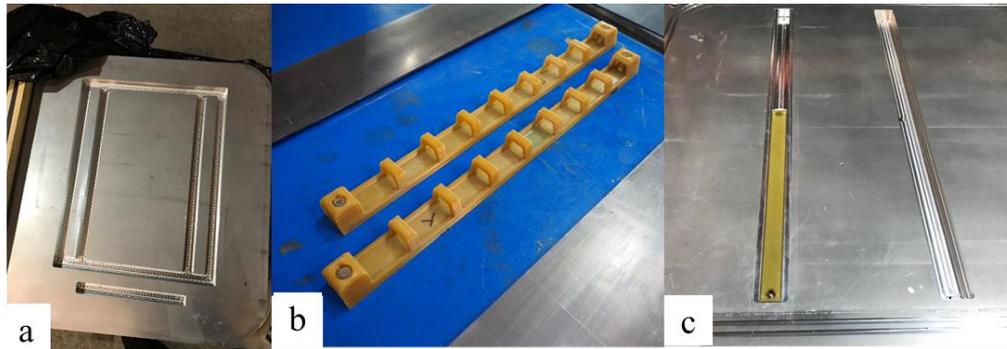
(a) Tooling for demonstrator (b) polymer inserts and (c) assembled coupon tooling.
